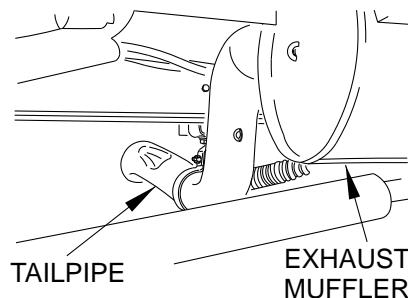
Exhaust Brake Pipe Assembly, Exhaust Pipe Assembly, or Muffler.
